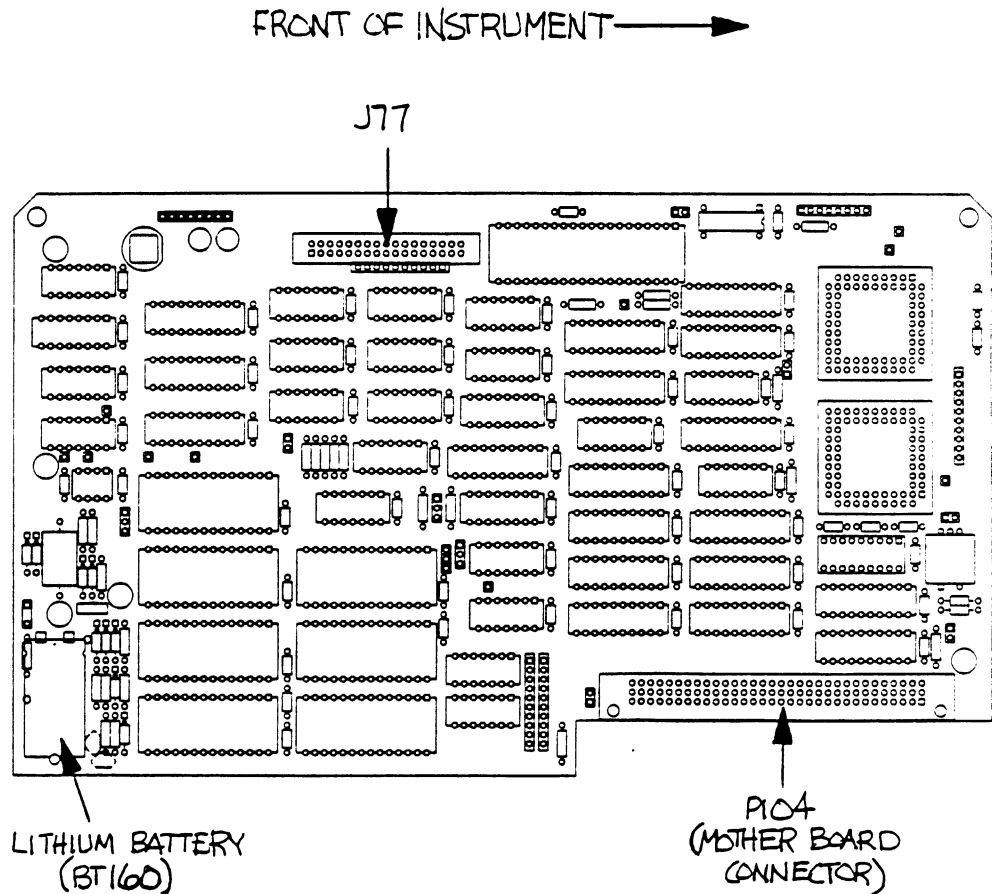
Connector locations for removal of the A17 Main Processor Board.
